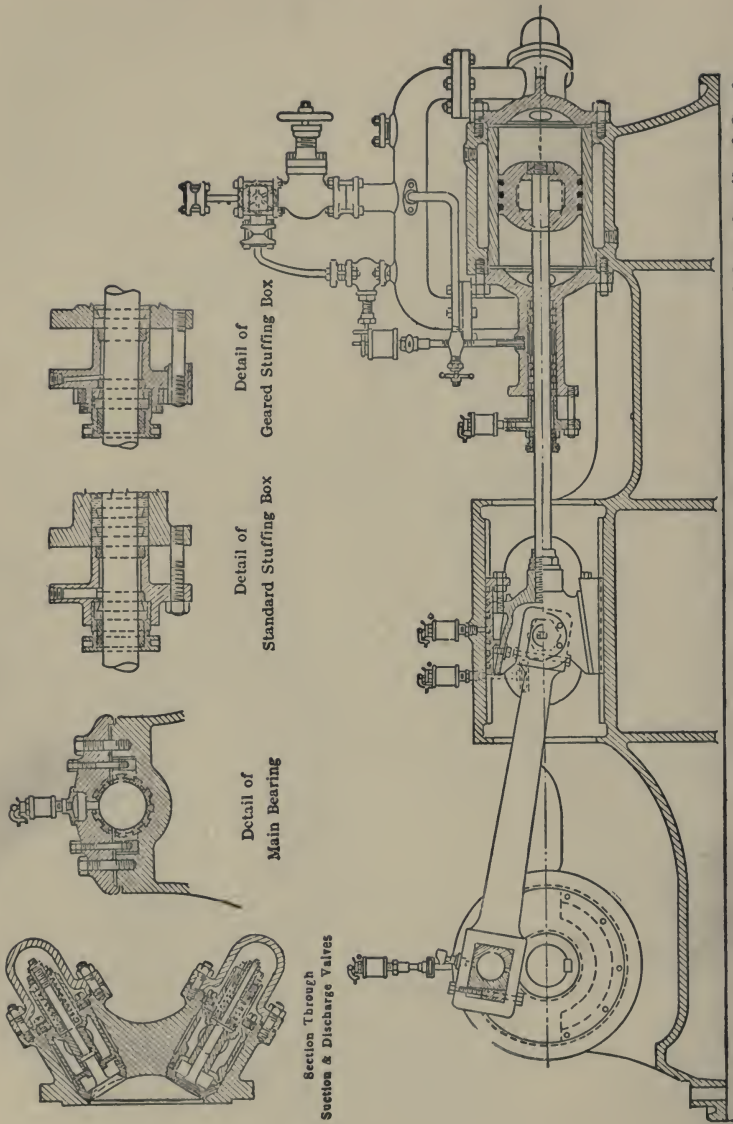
Section of a Triumph horizontal double acting compressor. [Note detail of Stuffing box main bearing and crosshead]
